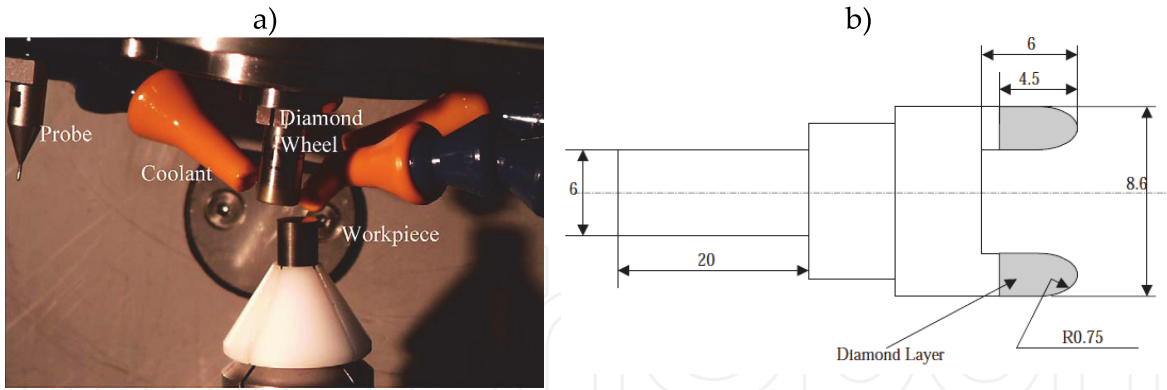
The ultraprecision grinding process of a spherical mirrors: a) set-up [10], b) schematic presentation of the diamond tool [12]
